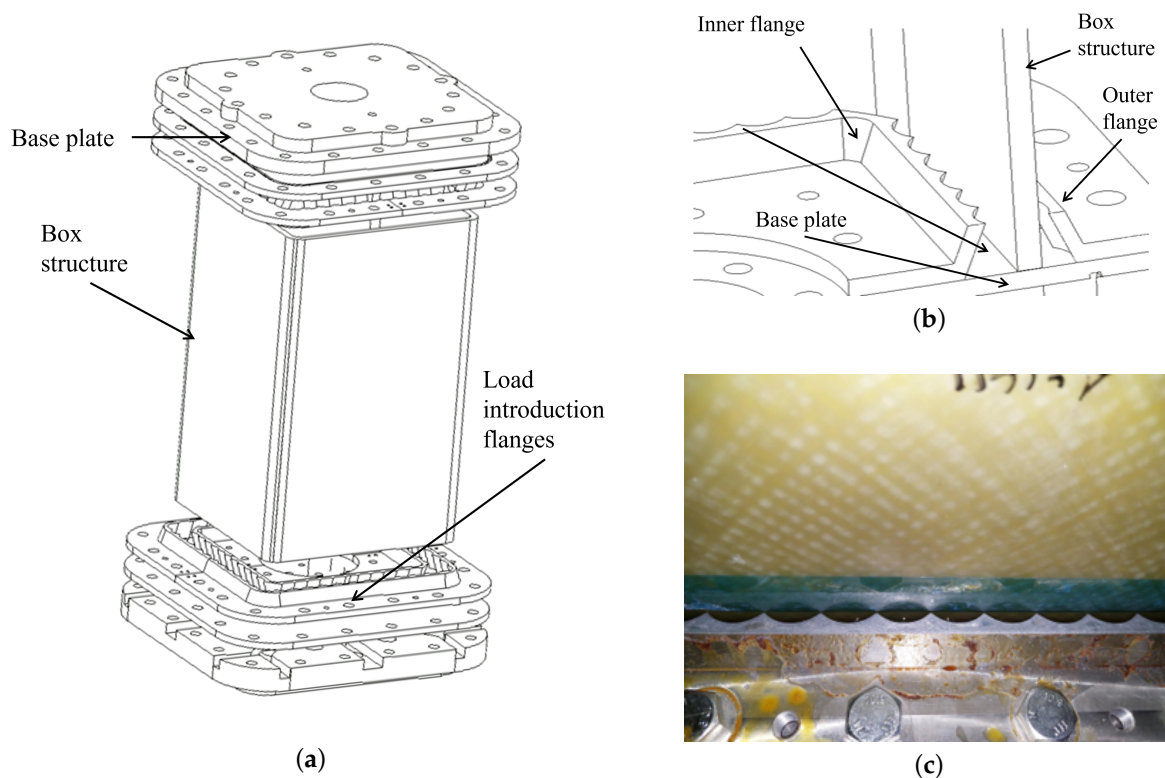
Fixture design for the hexapod-based fatigue testing of box structures under temperature-controlled uniaxial loading. (a) Exploded view of the hexapod fixture setup, showing box structure and load introduction elements. (b) Detailed corner view of the embedded structure. (c) Close-up of the lower fixture with airflow grooves.
